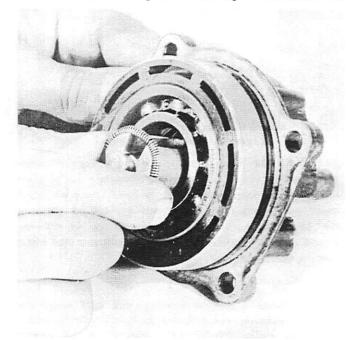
Inserting Ball Bearing Puller into End Cap Ball Bearing
